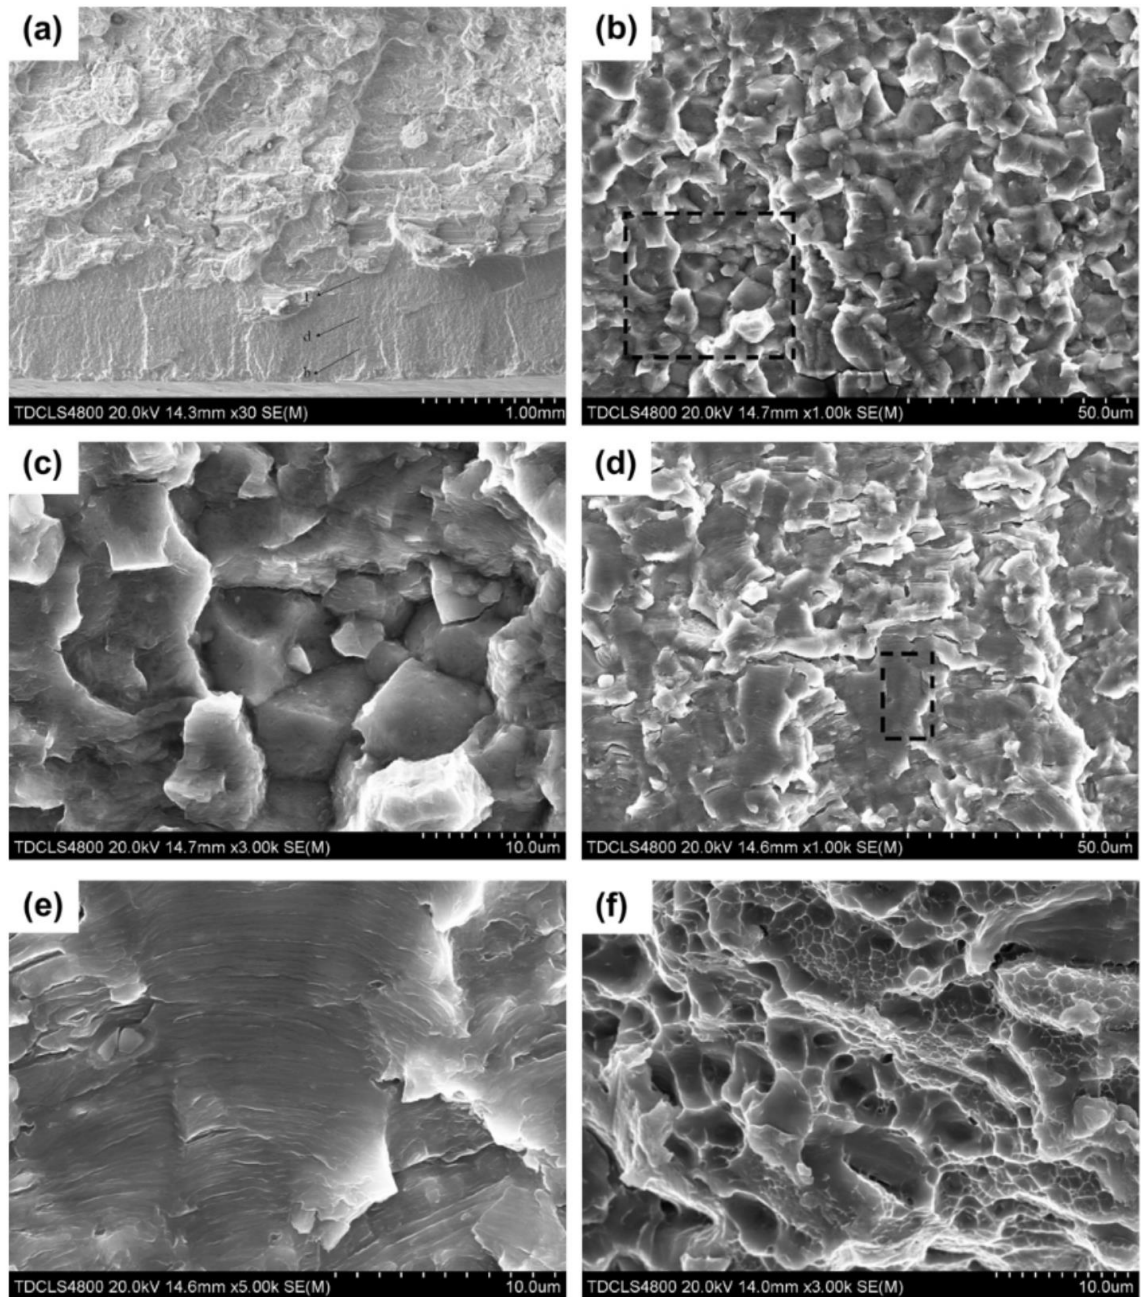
SEM images of fatigue fracture surfaces of the DPW specimen tested at 30 MPa stress amplitude ($R = 0.3$): (a) overall view of the fracture surface at a lower magnification, (b) magnified view near initiation, (c) intergranular cracking along the weak grain boundaries of equiaxed grains, (d) the fatigue crack propagation zone, (e) fatigue striations at a higher magnification of the dashed box in (d), (f) the final fracture region [72].
